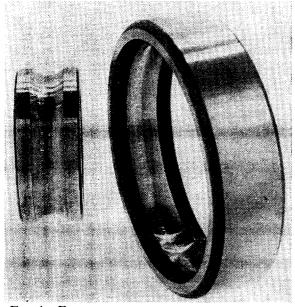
FALSE BRINELLING CAUSED BY VIBRATION The damage to the tracks of this bearing from a turbine turning motor occurred while the motor was stationary and was caused by vibration from the rotating turbine.
